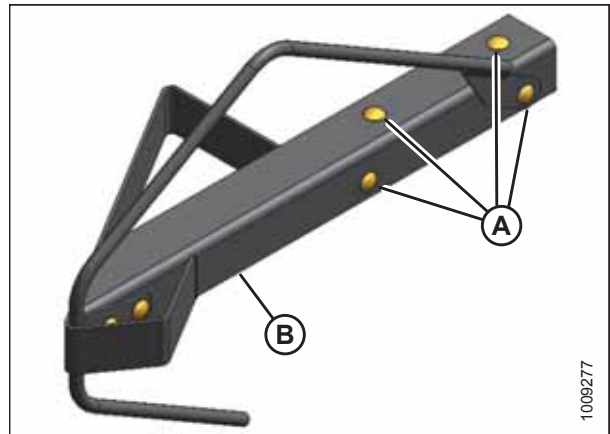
Tall Crop Divider Kit (Left Shown, Right Side Opposite)
